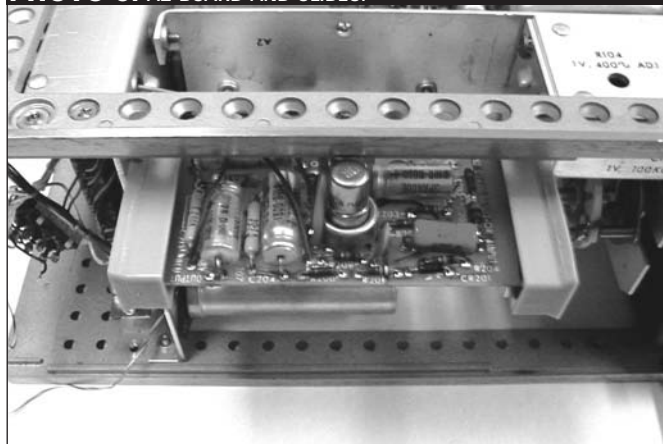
BOARD SLIDES WITH TAPE RESIDUE.
